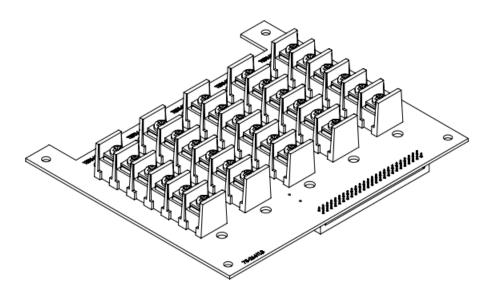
Isometric View of Diesel Machine Monitor's Terminal Block
